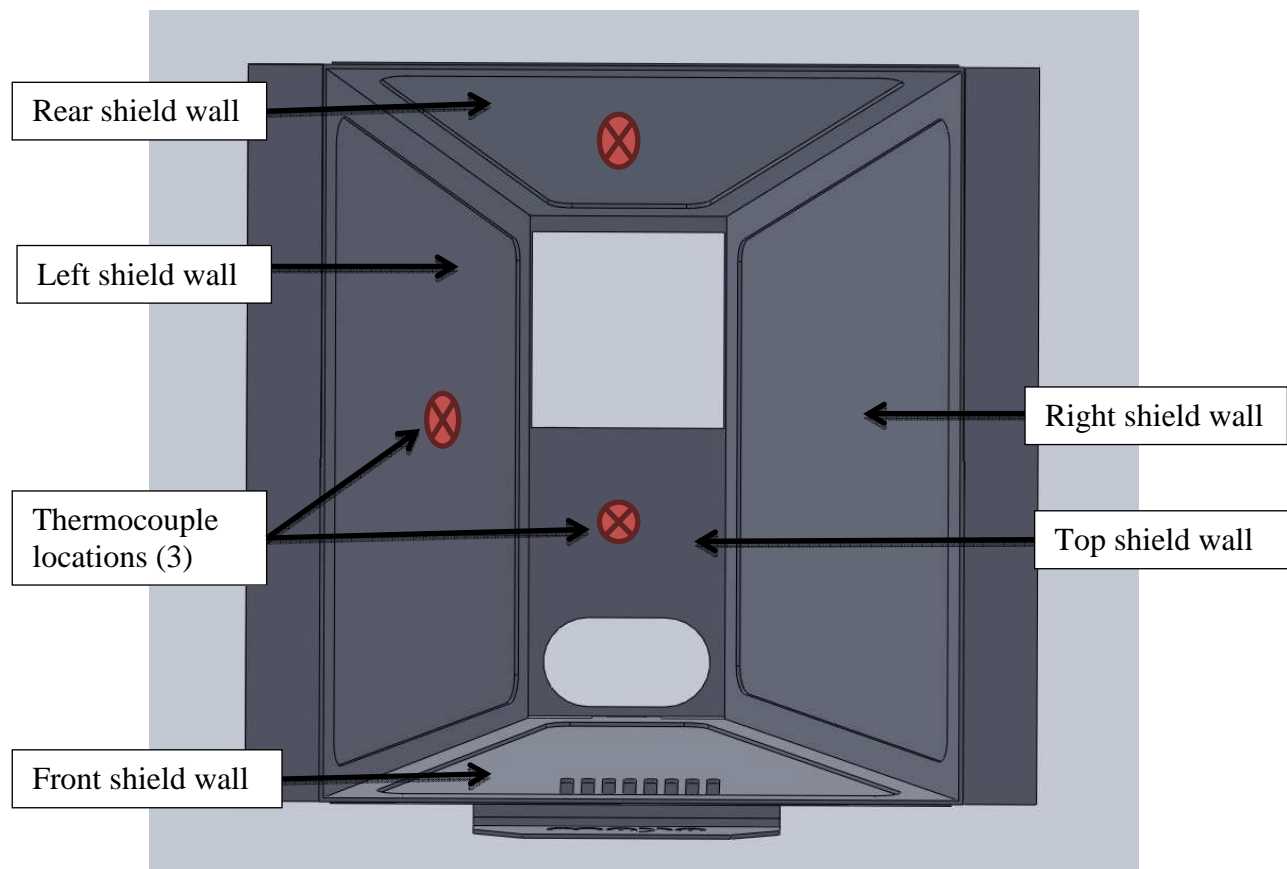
CAD RENDERING OF HEAT SHIELD AND BUILD PLATFORM; MAKING A 6-SURFACE ENCLOSURE.
